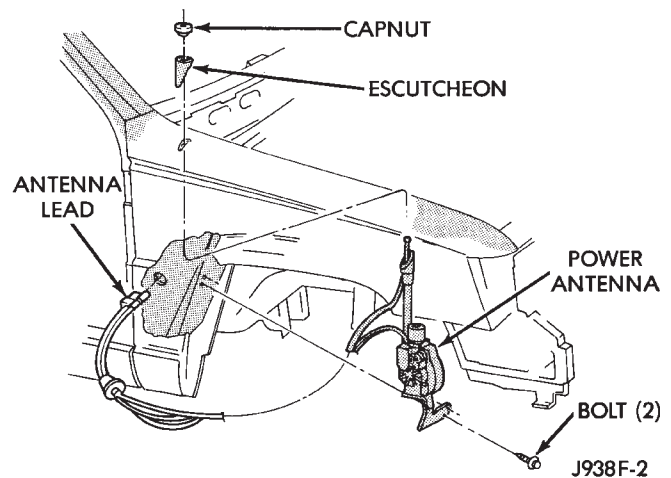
Remove/Install Escutcheon and Antenna Pad
